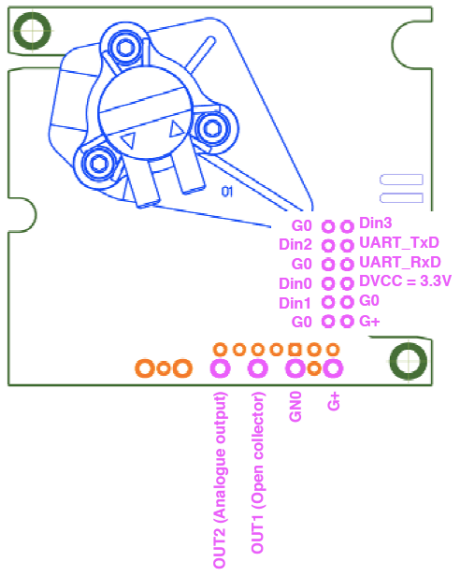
2mm Pitch – Possible connection terminals for connection by long wires
